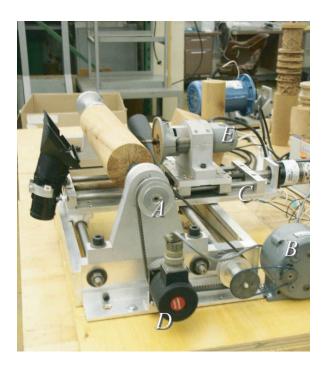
Our prototype milling lathe. Labeled in the lathe photograph are the spindle (A), a DC motor (B) driving the tool carriage (C), the encoder (D), and the router (E).
